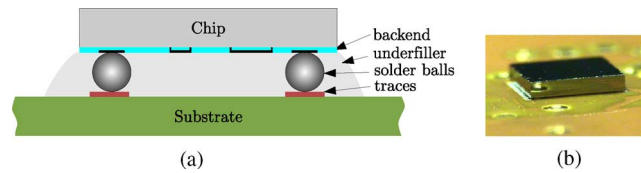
Flip chip mounting on substrate. (a) Cross section of flip-chip mount, (b) Photo of mounted chip.
